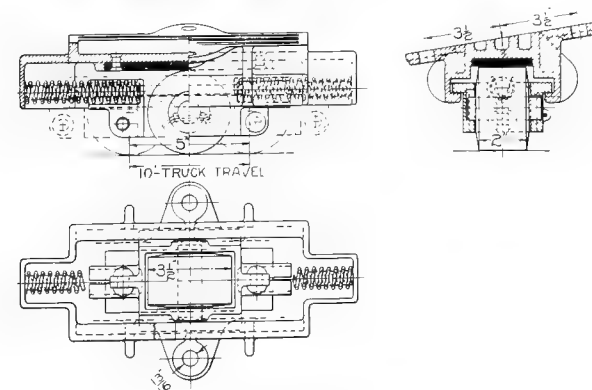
Drexel Single Roller Side Bearing for Freight Service.
